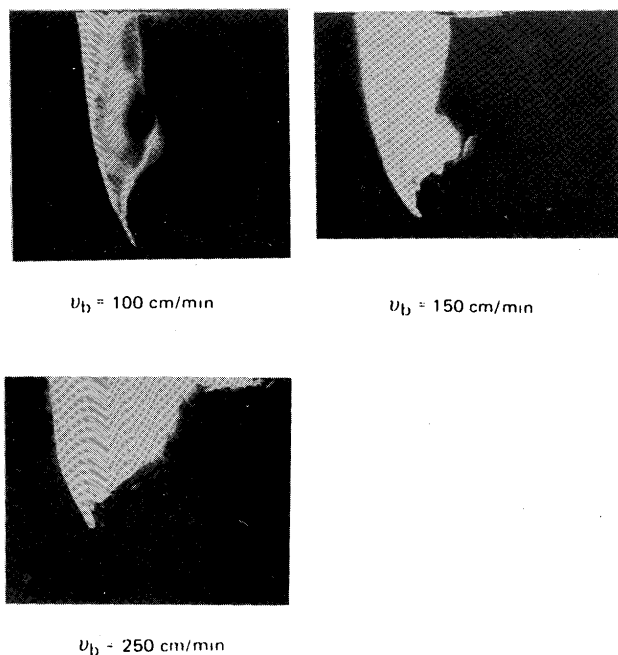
High speed photographs of beam hole by optical method. (laser beam welding of glass, atmospheric pressure, 8000 frames/s).
